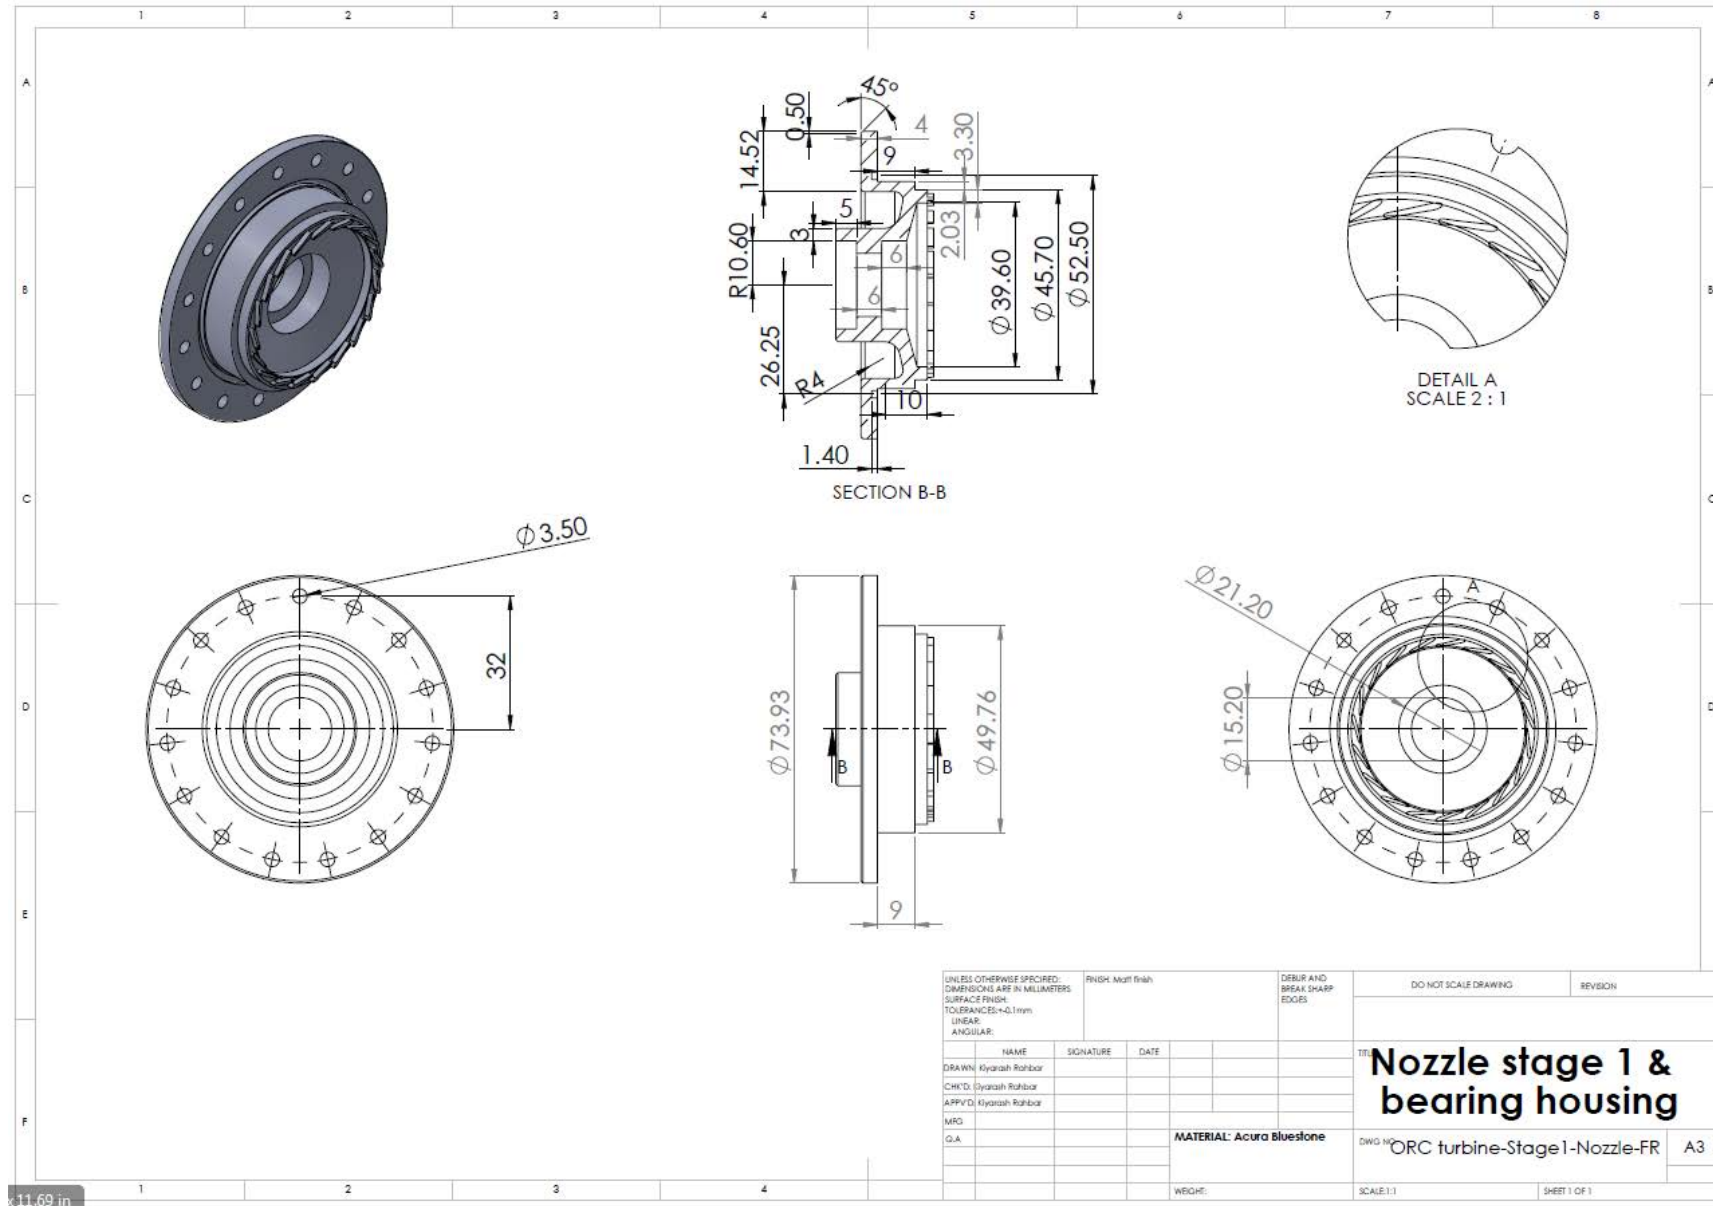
Nozzle stage 1 and bearing housing - detailed two-dimensional drawing
